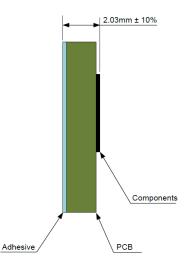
Stack-Up (A) - Thickness: PCB + 3M double sided adhesive
